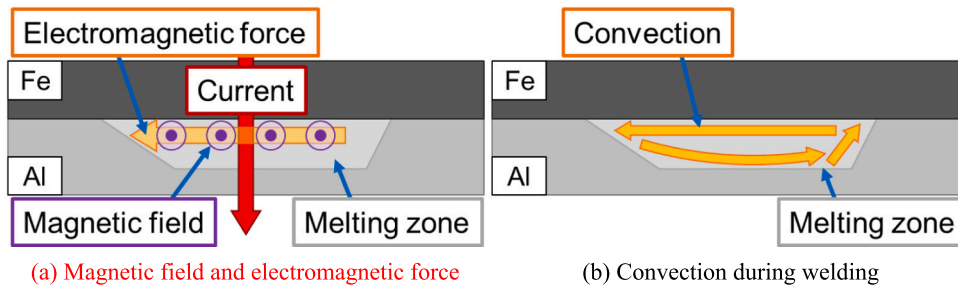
Process for generation of convection in joint with magnetic field. (a) Current and magnetic field during welding. (b) Convection during welding.
